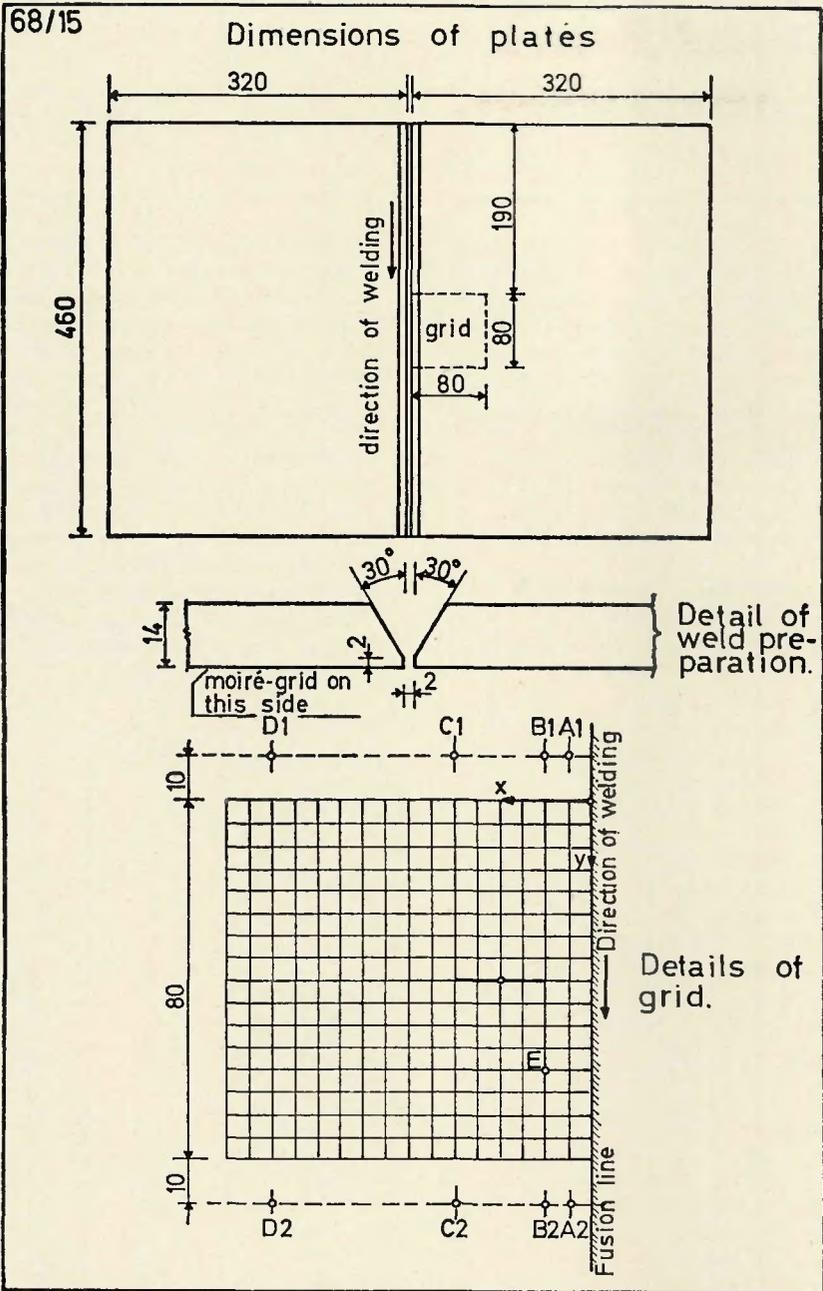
Weld preparation for moiré study. Dimensions in millimeters
